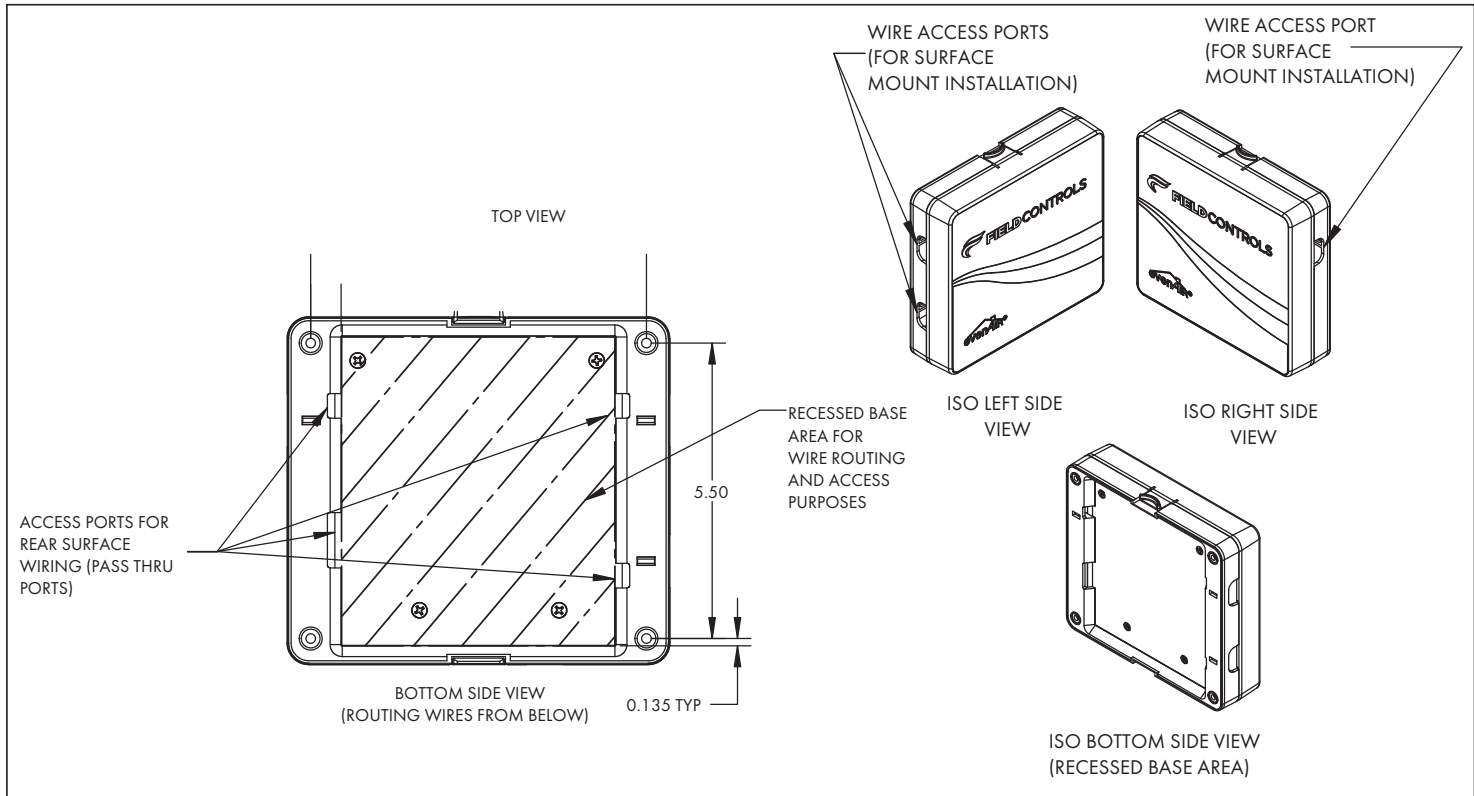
EvenAir 2.0 Wire Access Ports and Rear Surface Recessed Wire Throughs
